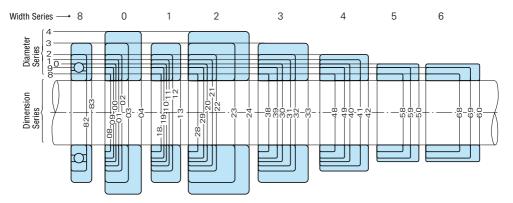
Comparison of Cross Sections of Radial Bearings (except Tapered Roller Bearings) for various Dimensional Series
